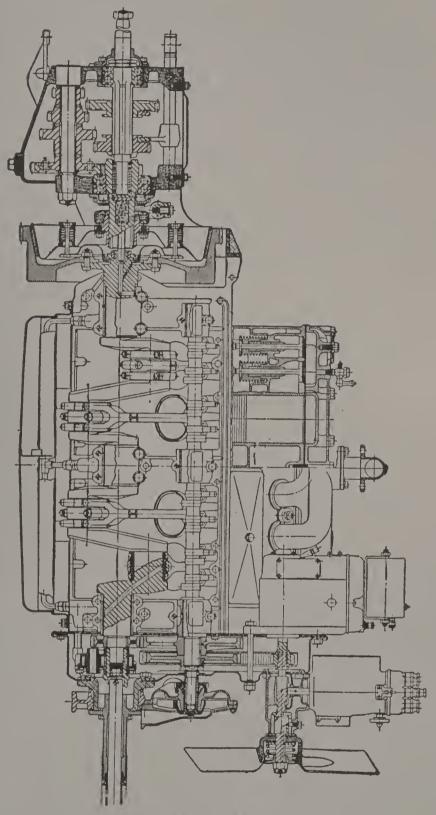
Side View of Eight Cylinder "V" Type Engine
